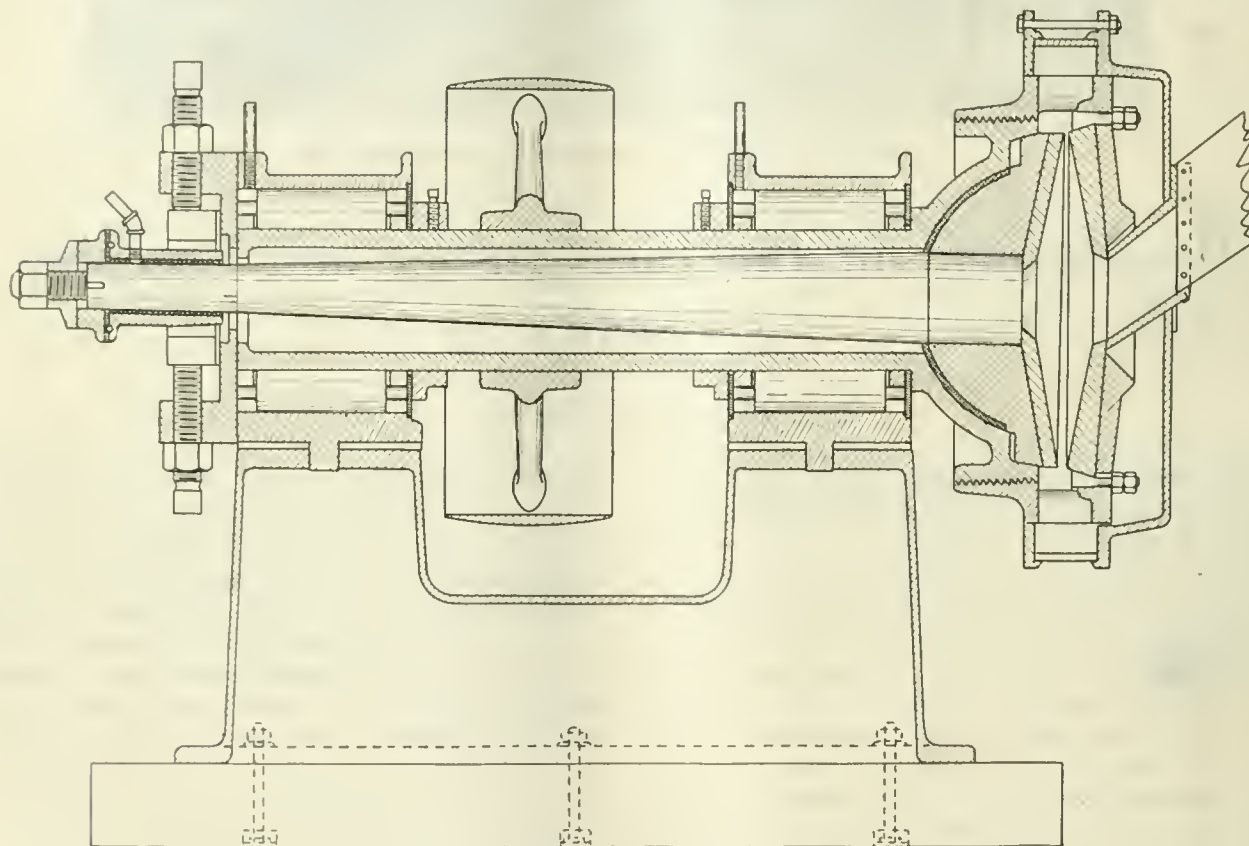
THE ORIGINAL DISC-CRUSHER, KNOWN AS THE SYMONS SAND MACHINE
